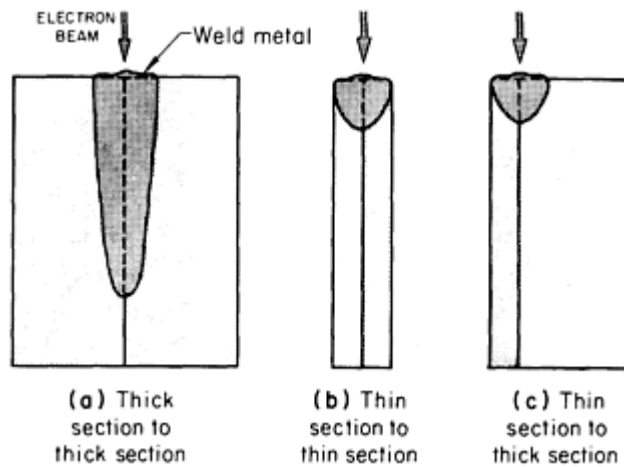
TYPICAL WELDS GENERATED BY EBW OF EDGE JOINTS HAVING COMPONENTS OF EQUAL AND UNEQUAL SECTION THICKNESSES
